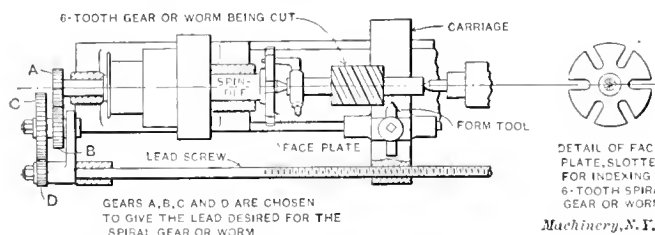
The Lathe Method of Planing Helical Teeth in Gears or Worms.
